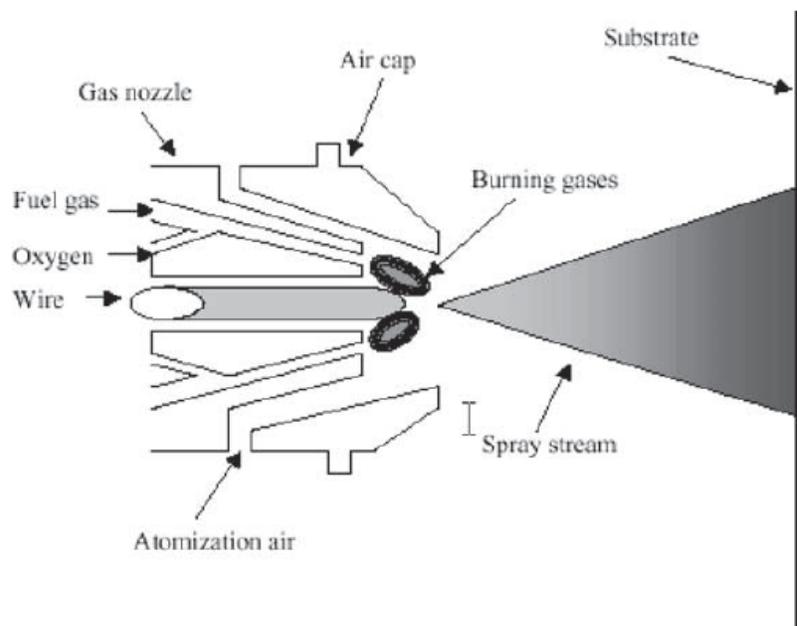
Schematic of a typical flame-wire spray gun. (Figure reprinted with permission from *NCHRP Report 528: Thermally Sprayed Metal Coatings to Protect Steel Pilings: Final Report and Guide*. [Ellor et al., 2004])
